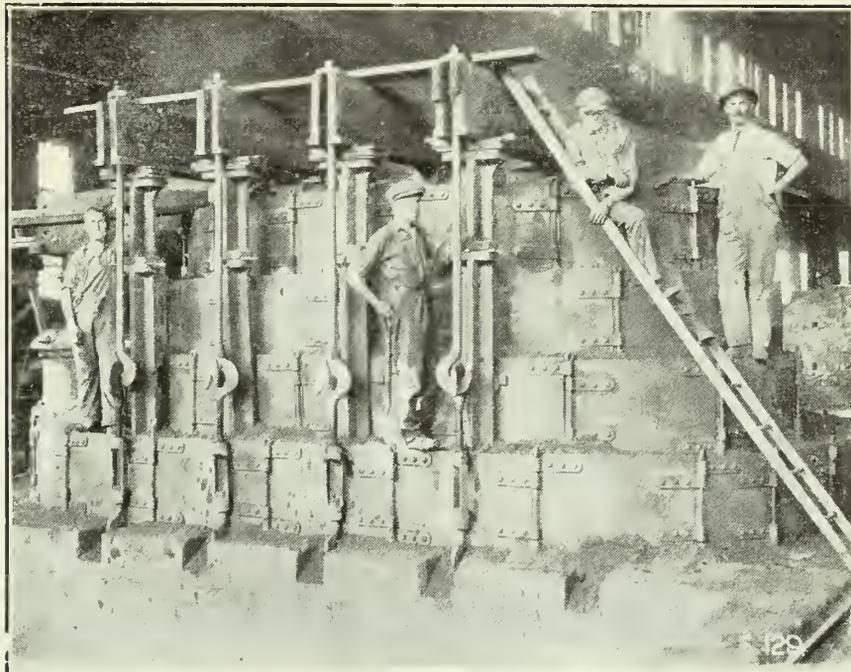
Mould for runner section of 11,300 H.P. turbine closed ready for pouring. Attention is drawn to the sectional style of flask.
